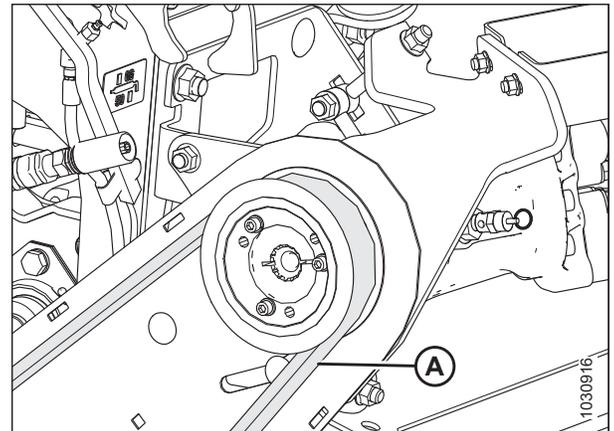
Drive Pulley – Conditioner Drive Motor
